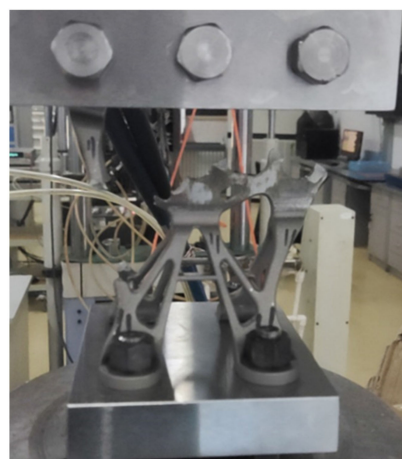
New bracket fracture during the fatigue test by MTS-250kN-1.
